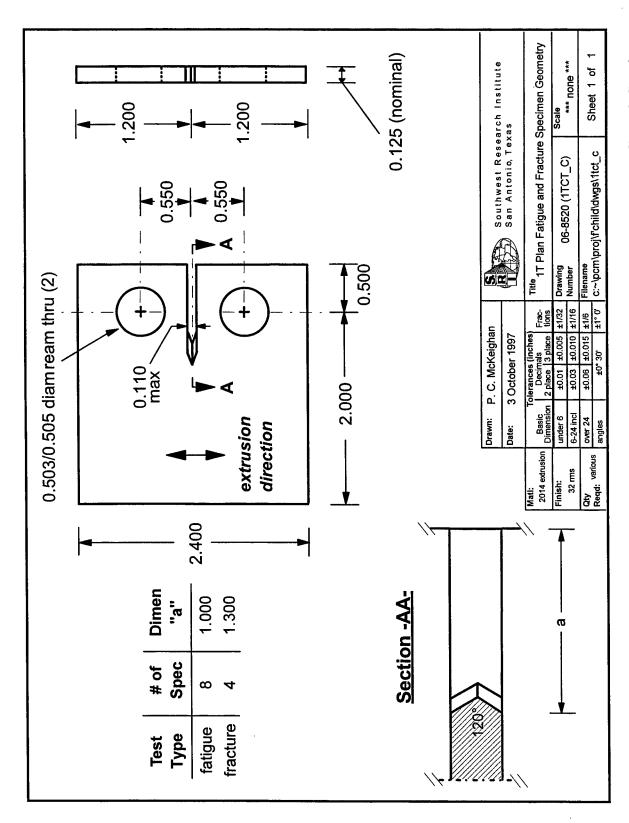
Design for the 1-T Plan Geometry Compact Tension Fracture and Fatigue Crack Growth Specimens
